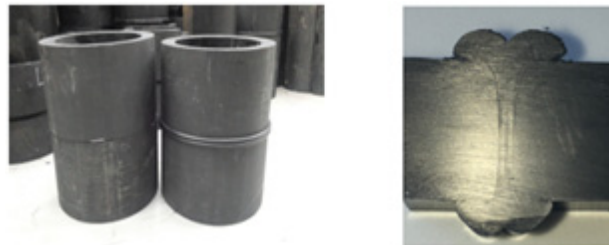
High density polyethylene pipes. (a) Before and after butt fusion, (b) butt fusion cross-section showing MFZ and fusion beads produced by the squeeze flow of molten material.
